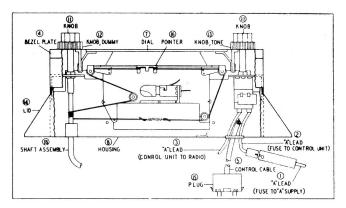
Control Unit C627M (Ford), Showing Location of Parts and Dial-Cord Installation Details
